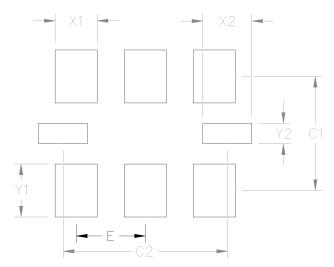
Si544 (5x7 mm) PCB Land Pattern
